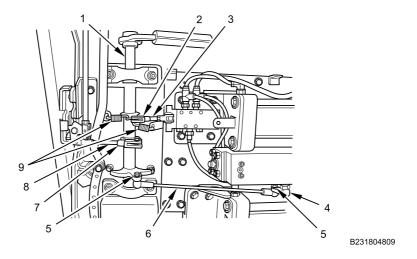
Retaining Clips, Springs, and Door Linkage Rods Removal.
